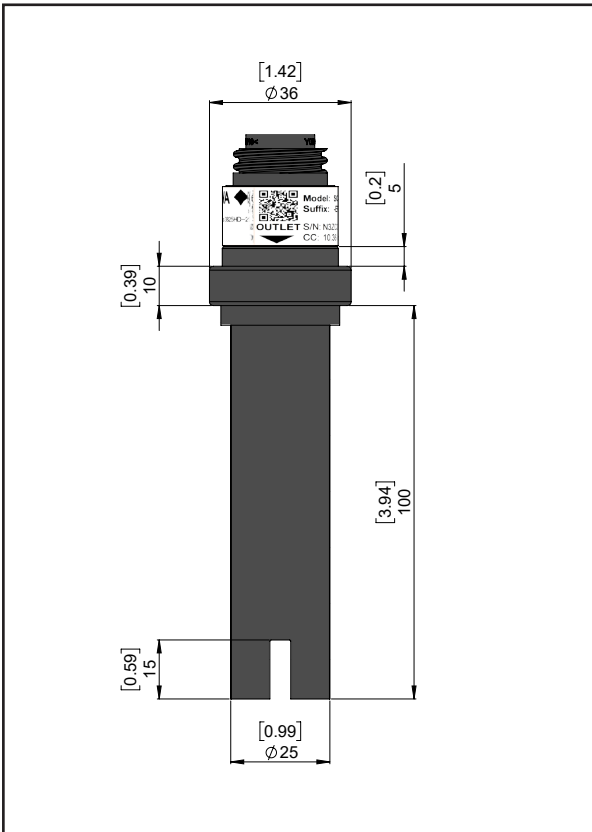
Dimensions of SC42 SV34 / SG34 (in mm [inches])
